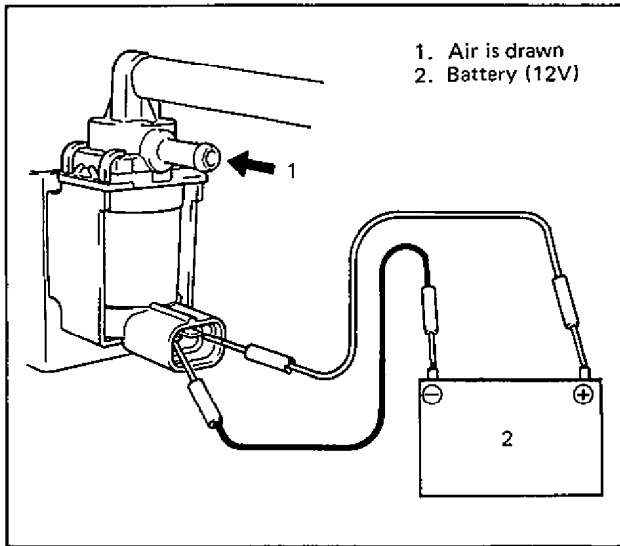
E-143 Checking ISC Solenoid Valve (2)
